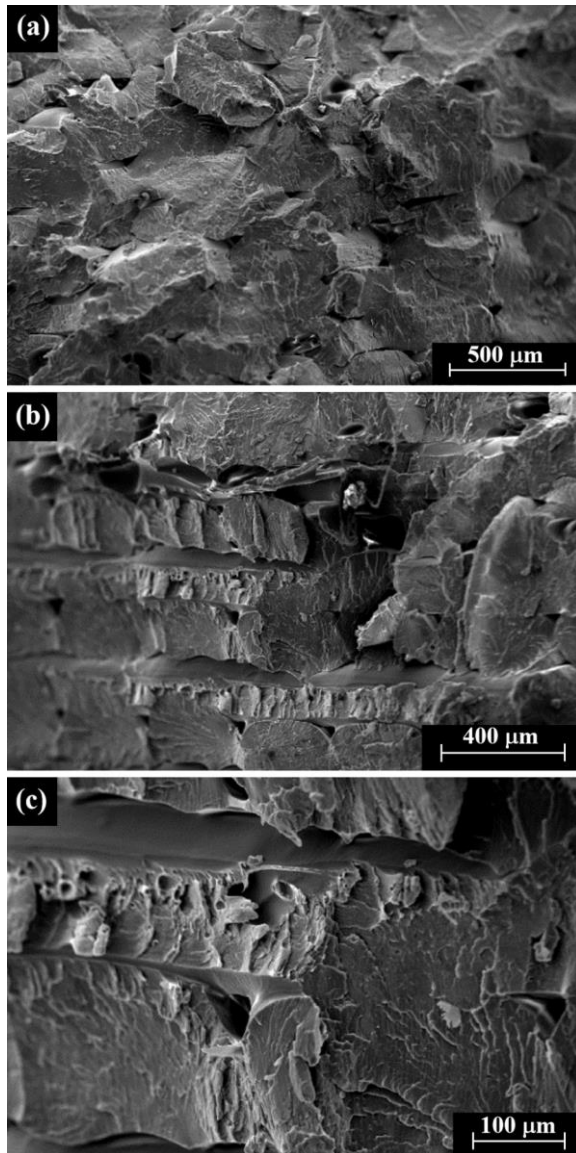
SEM images of flat and on-edge fracture surfaces: (a) typical flat orientation's fracture surface, (b) and (c) typical flat and on-edge fracture orientations revealing the layered configuration of the material
